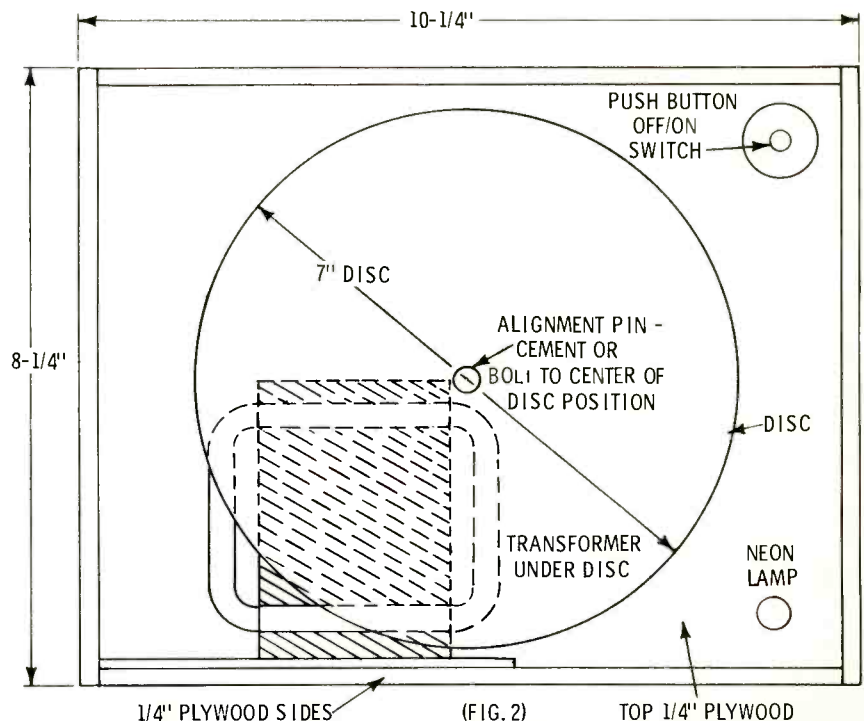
The finished junk-box eraser is assembled in a plywood housing.
